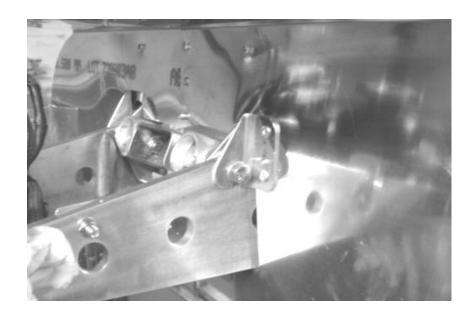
Firewall support brackets, should be fitted on the engine mount bolts at the front of the SKR19's at this stage as shown (normally found packaged with firewall parts) use a thin plastic washer between these brackets and the SKR.298 plates
